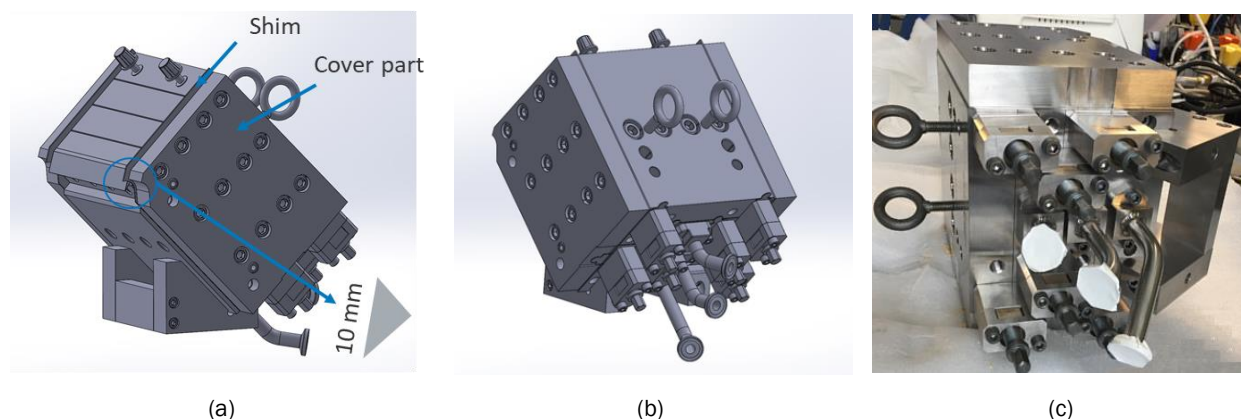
(a) The design drawing for the side view of the three-layer slide die showing the three slide manifolds (roughly horizontal in the image) on the face of the slide, (b) the design drawing of the end view of the slide die, and (c) an image of the slide die laying on its side from the rear. Source: NREL
